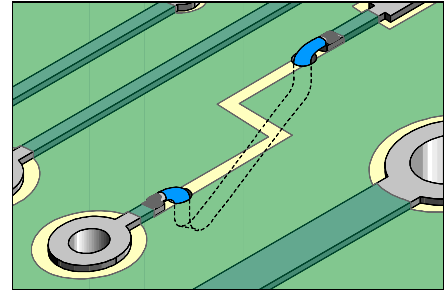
Lap solder the wire to the circuits on the PC board surface.
